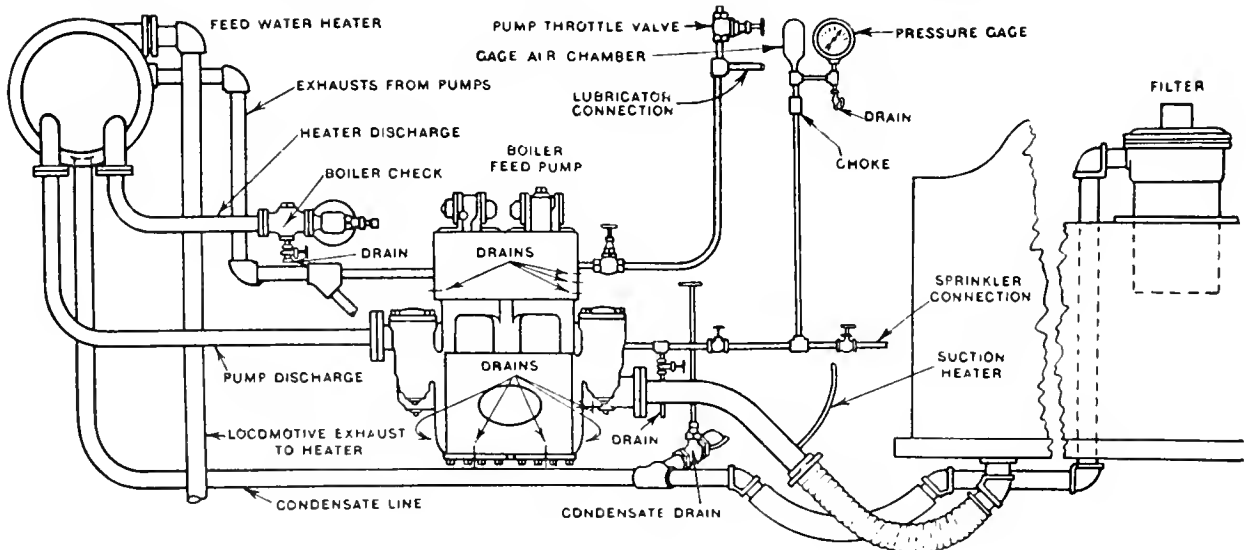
Piping Diagram Showing Layout and Application of Elesco Heater
